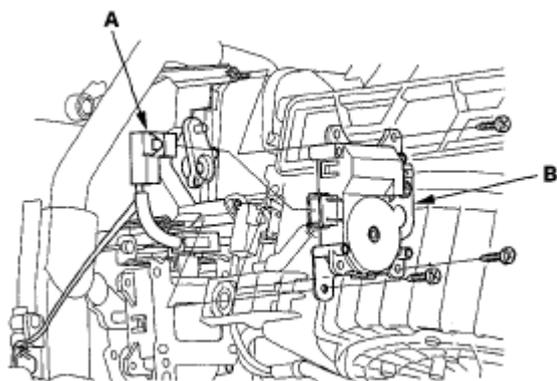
Identifying Passenger's Cool Vent Control Motor And Fasteners
